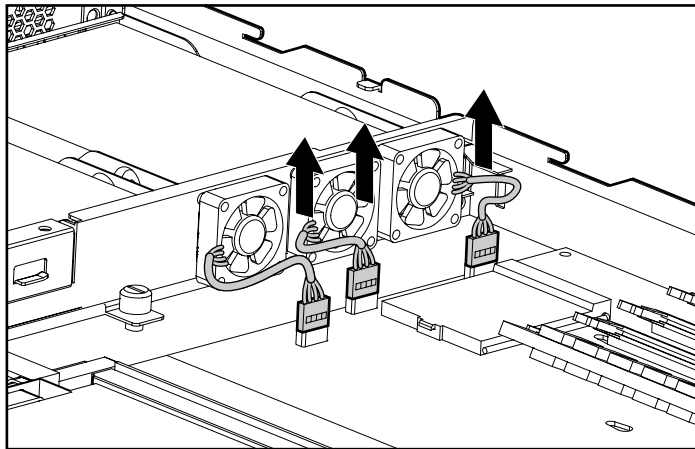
Disconnecting the center wall fan cables (processor removed for clarity)
